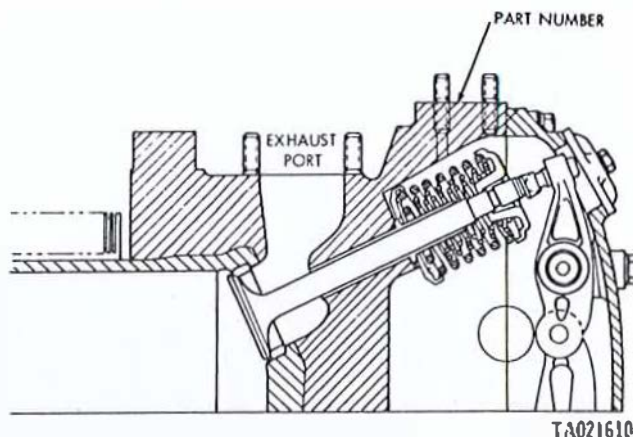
Location of standard and oversize cylinder assembly identification numbers.
